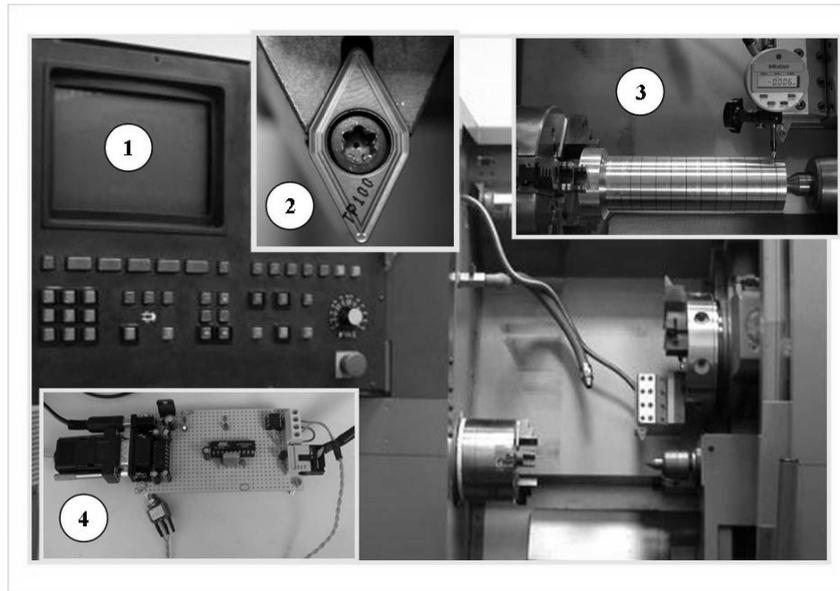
Experimental devices for the turning test and measurements of roundness: 1. CNC horizontal lathe equipped with a numerical control. 2. Tools used. 3. Digital-clock comparator. 4. Adapter to the RS-232 of PC.
